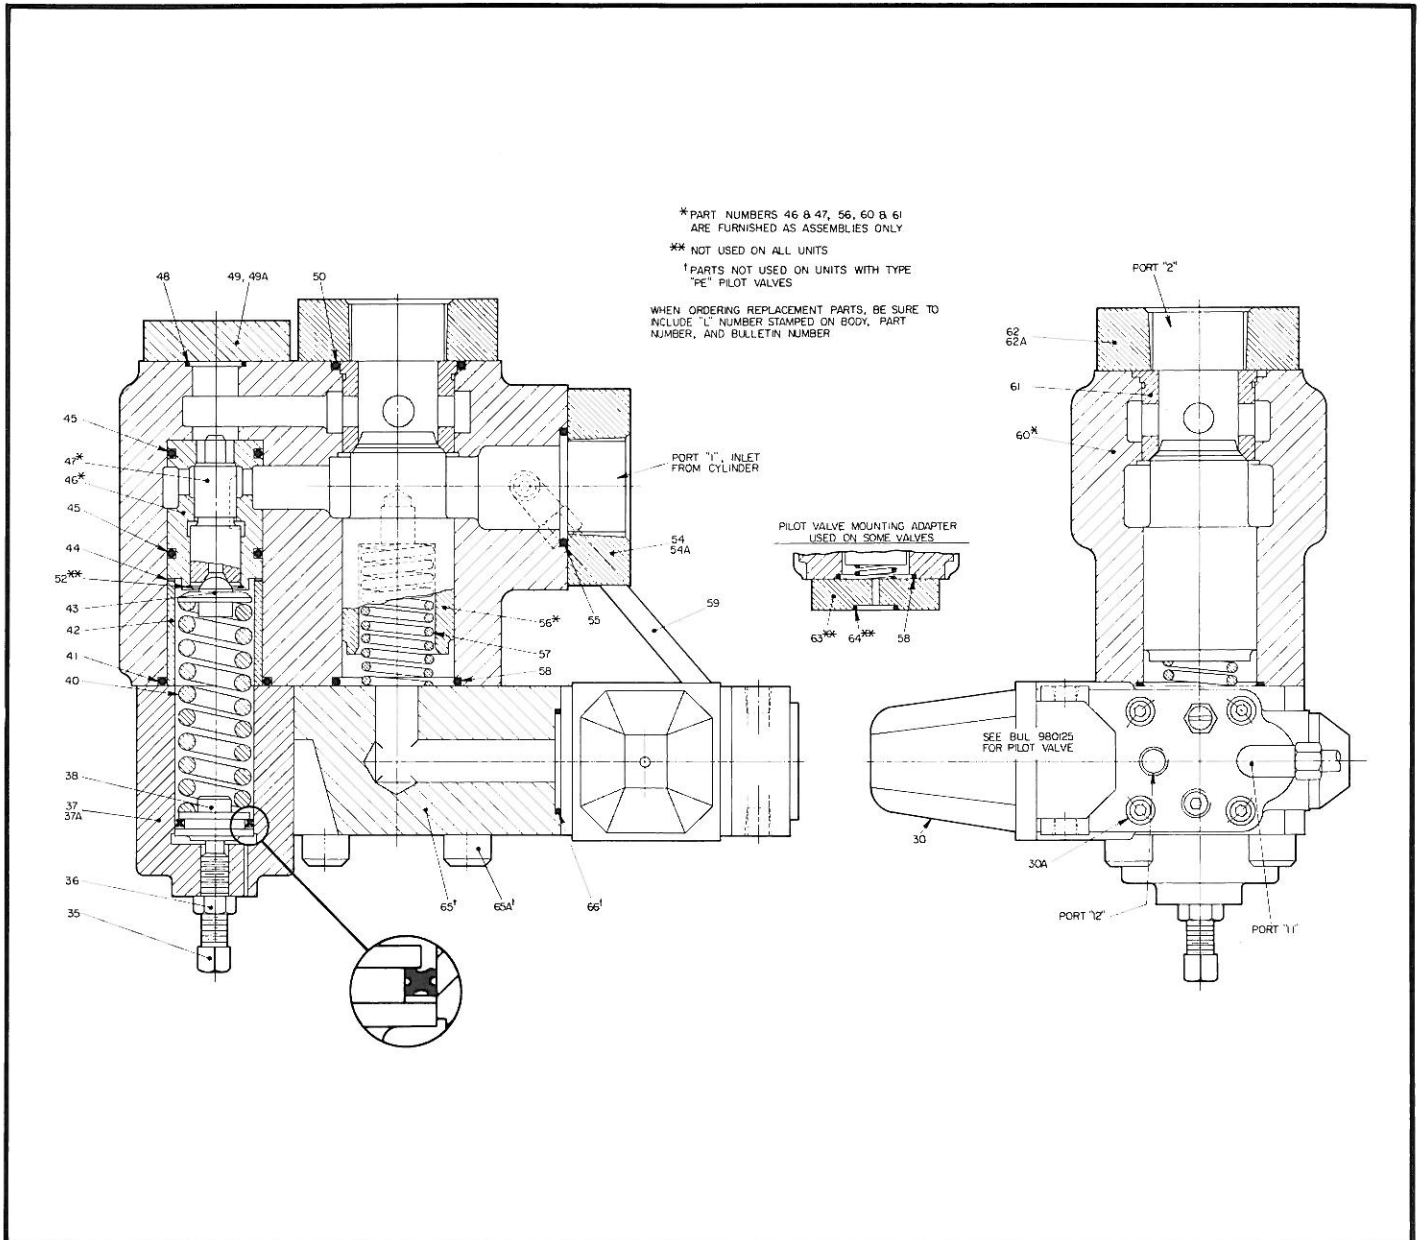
Parts drawing of solenoid operated foot valve (501691-E).
